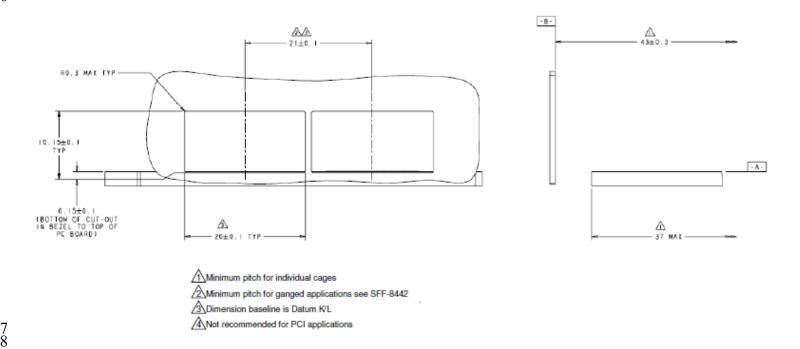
A - Recommended Bezel Design for cages that extend into or thru Bezel
